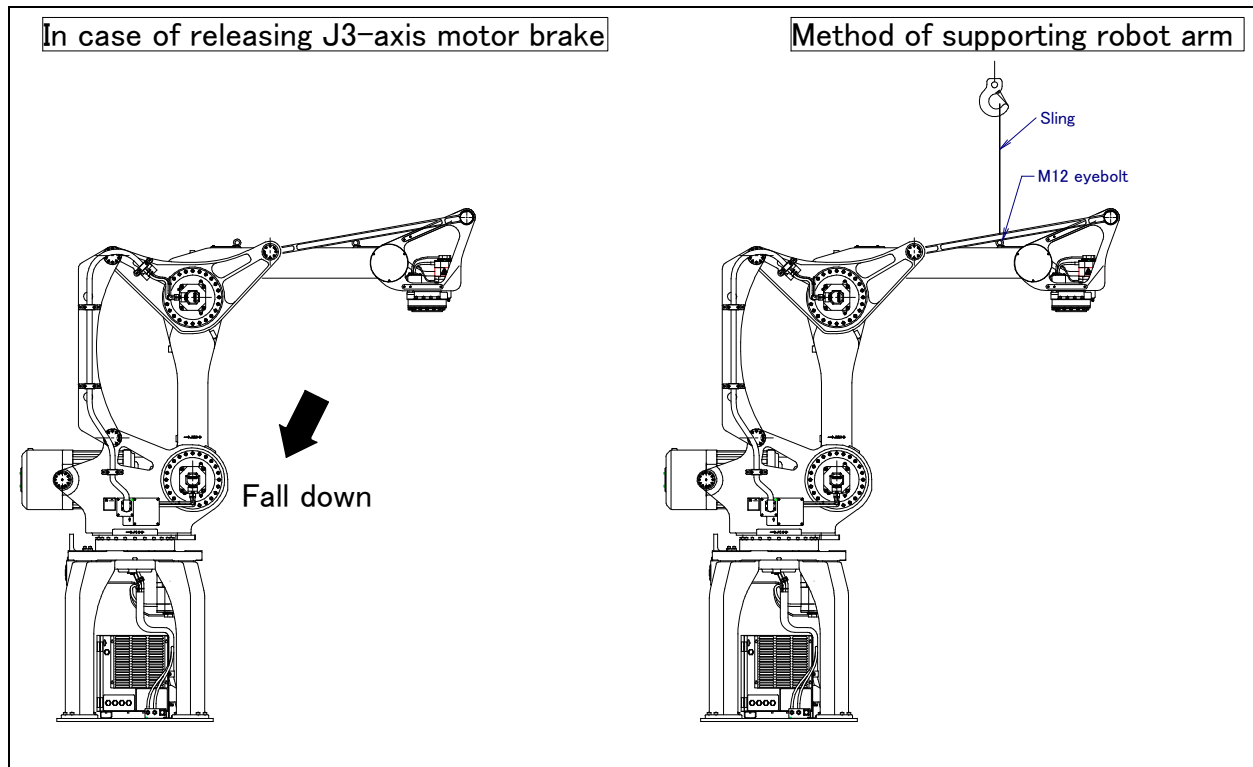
(b) Arm operation by the release of J3-axis motor brake and measure
